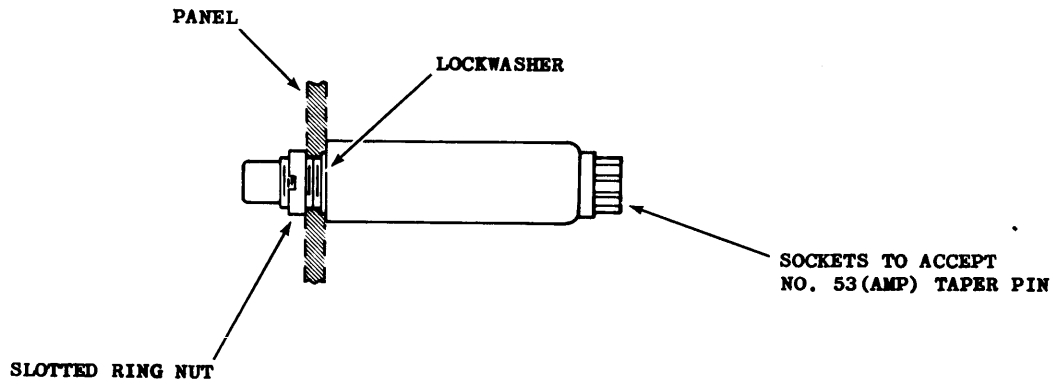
INDICATOR SWITCH LIGHT DRIVER ASSEMBLY
